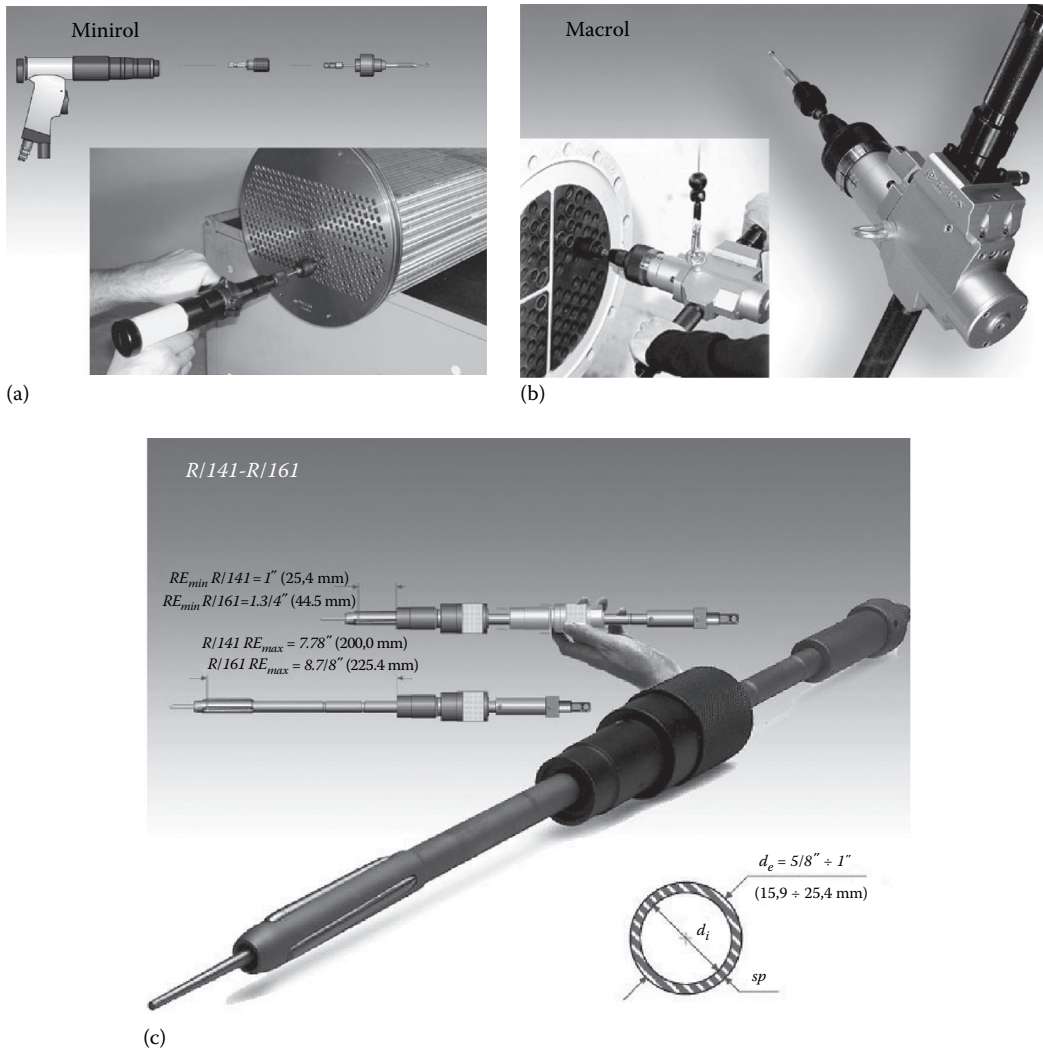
Pneumatic tube-to-tubesheet rolling machines. (a) Mini torque controlled pneumatic rolling machines for tubes diameter 6.3–15.9 mm (1/4”–5/8”), (b) Macrol—torque controlled pneumatic rolling machines for tube diameters 12.7–50.8 mm (1/2”–2”), and (c) step-by-step expander for thick tubesheet. (Courtesy of Maus Italia F. Agostino & C.s.a.s., Bagnolo Cremasco (Cr), Italy.)
